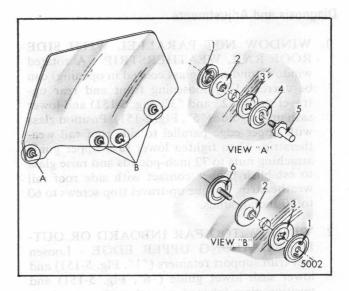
Rear Door Window Assembly - "6CB69" Styles
